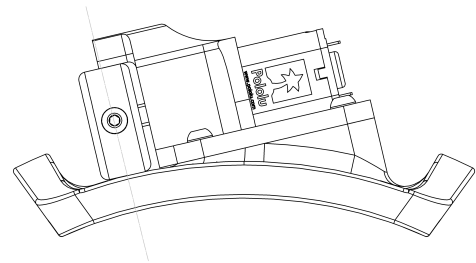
Side view of CAD drawing of one actuating unit with normal line to skin curvature
